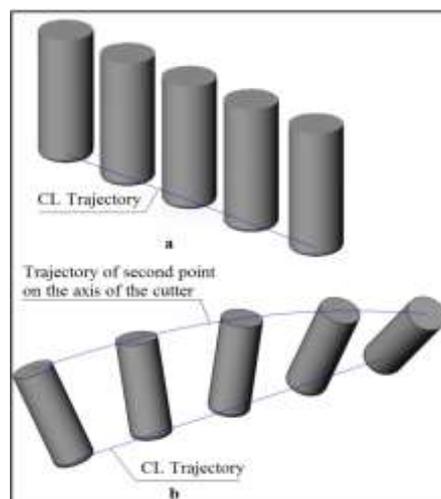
Radius end mill cutter moving through space along CL trajectory (a) 3-axis, (b) 5-axis.
